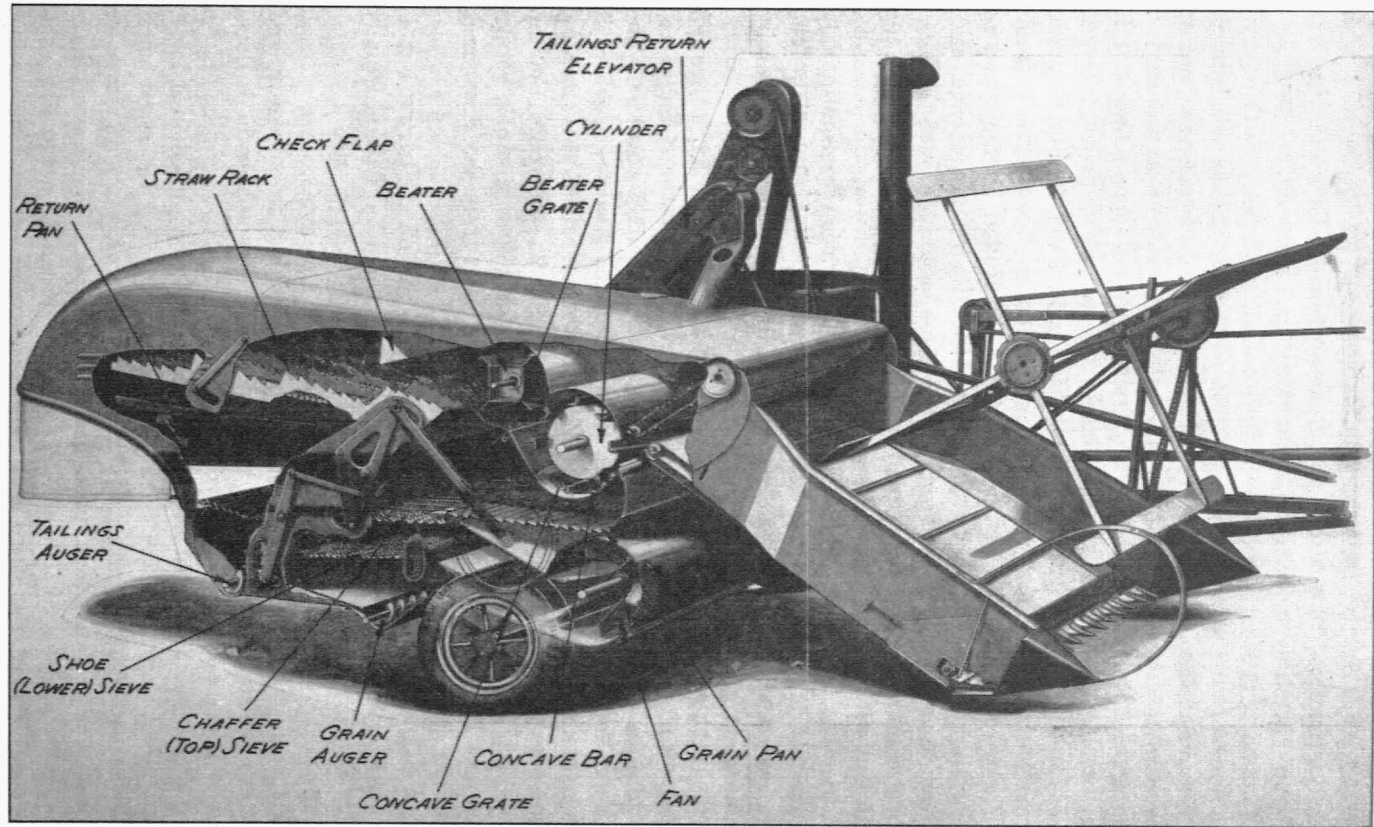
Cross-sectional view of a typical combine, showing arrangement of the various units inside the machine.
